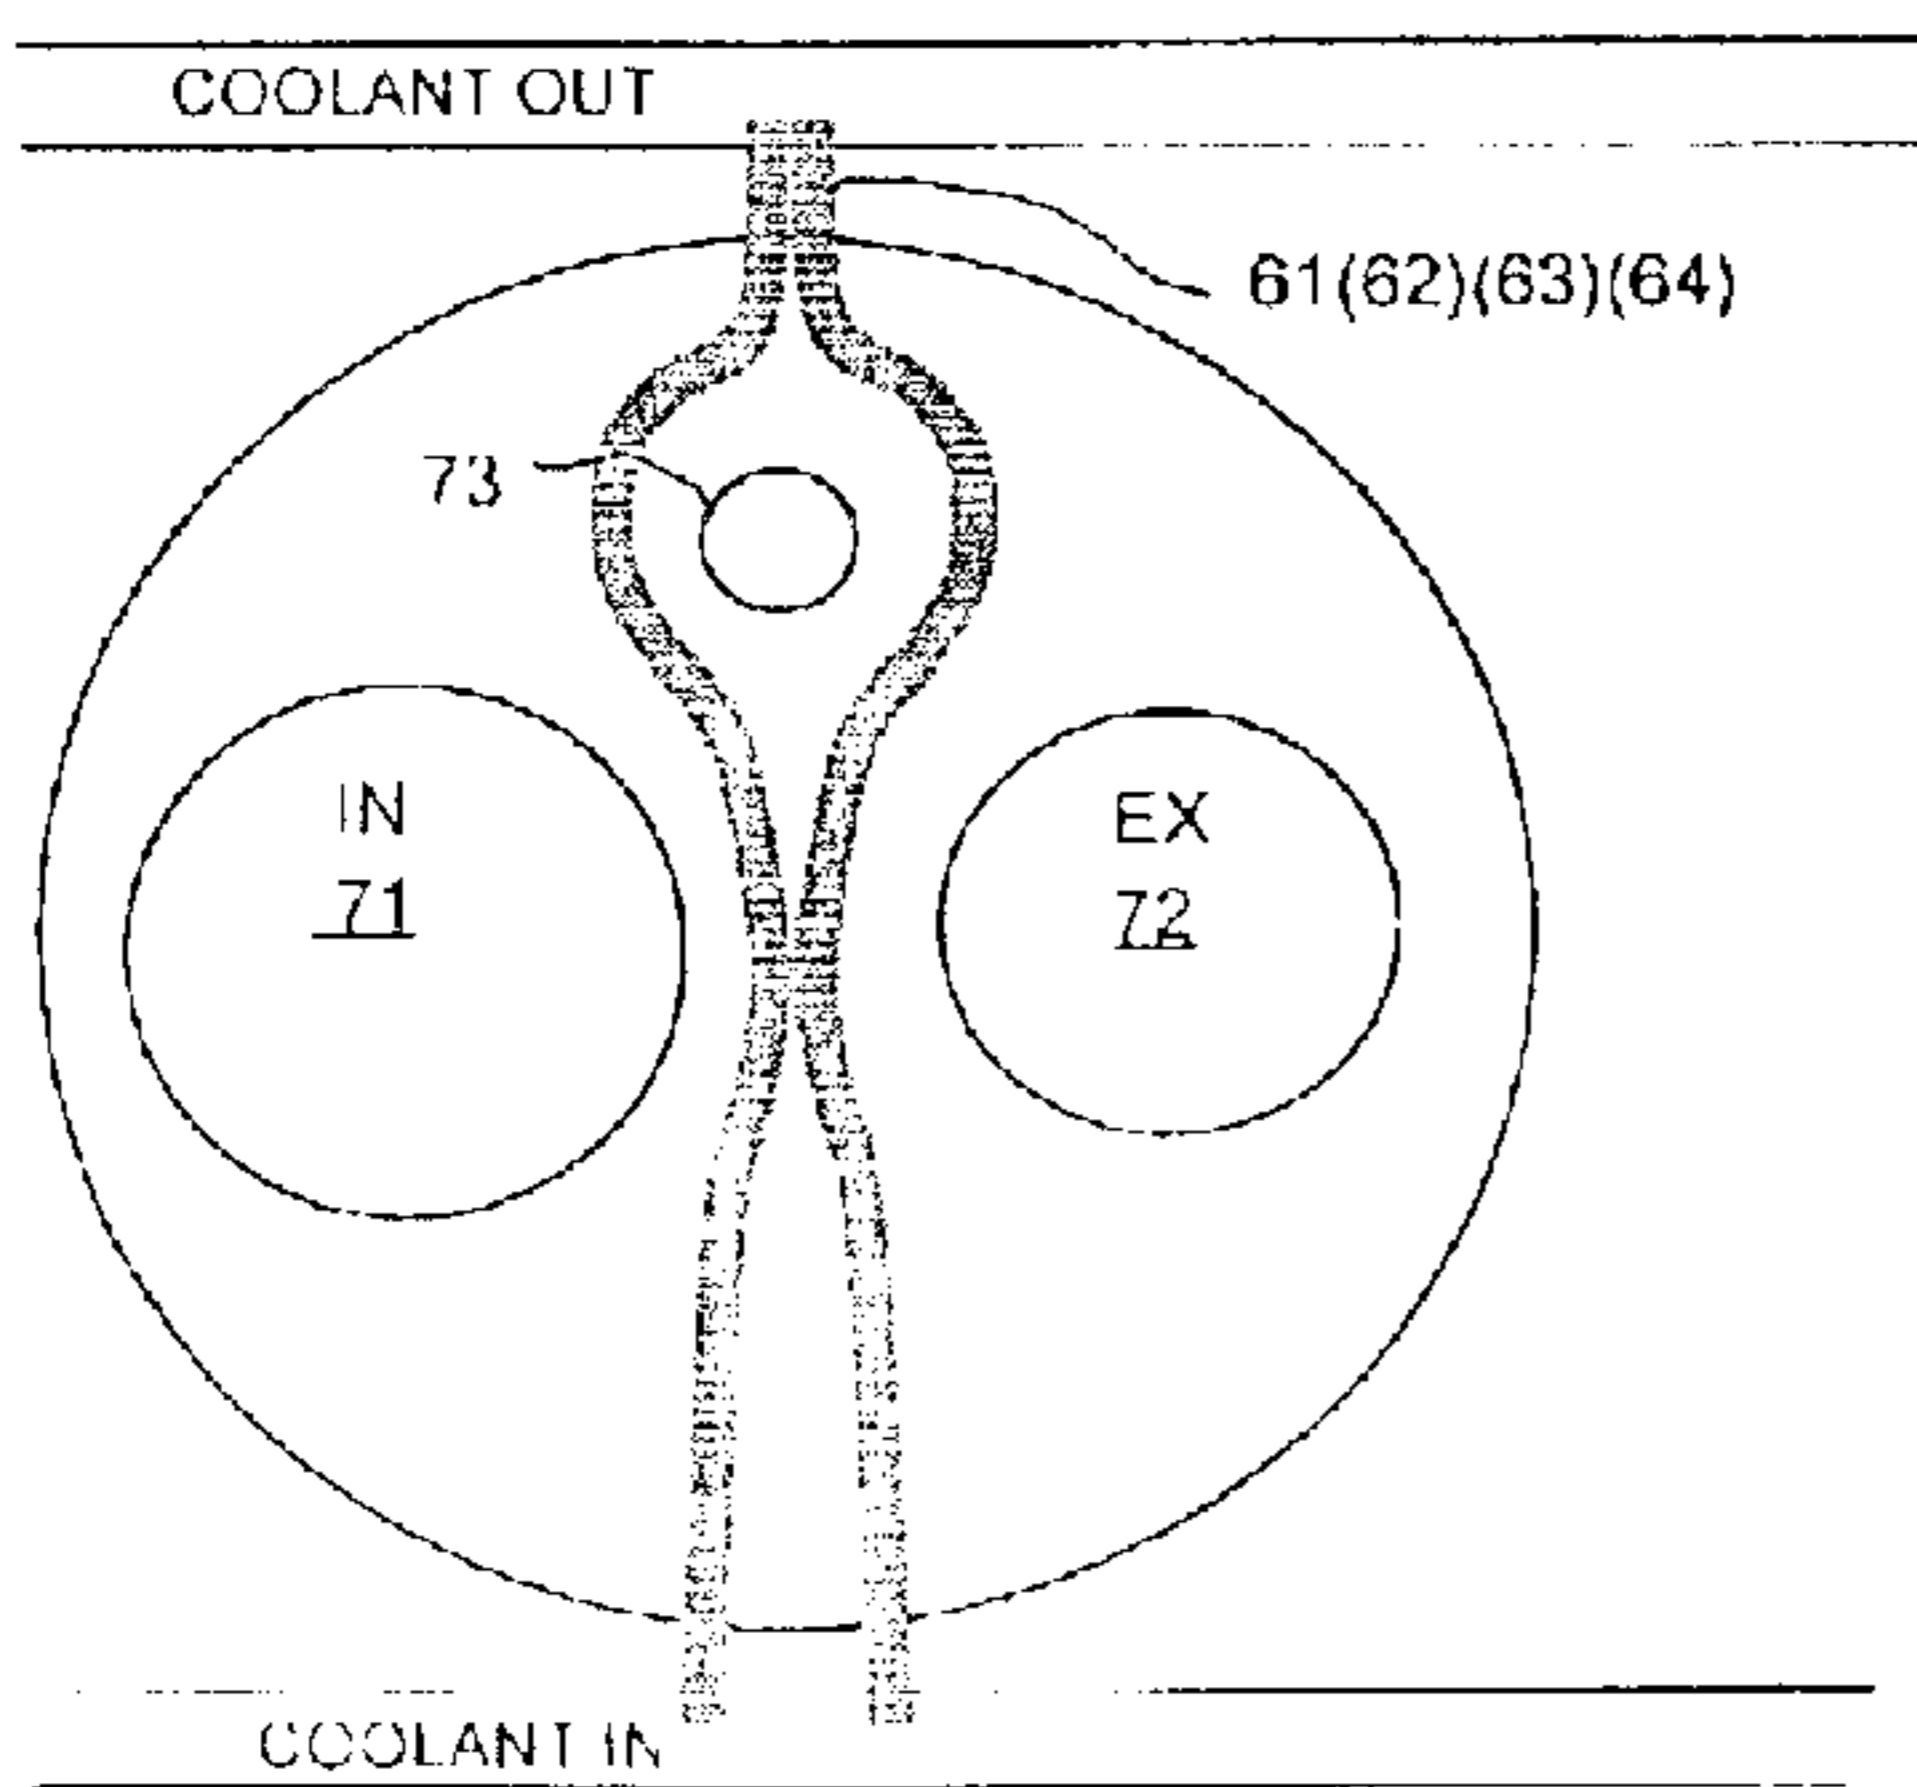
Cooling the Intake Valve and the Exhaust Valve
